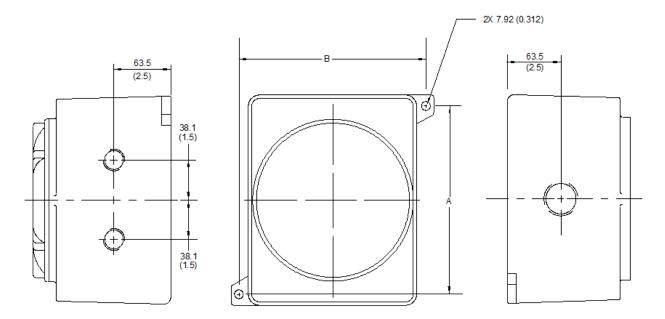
CA72341 2-Unit Explosion-Proof Housing Dimensions
